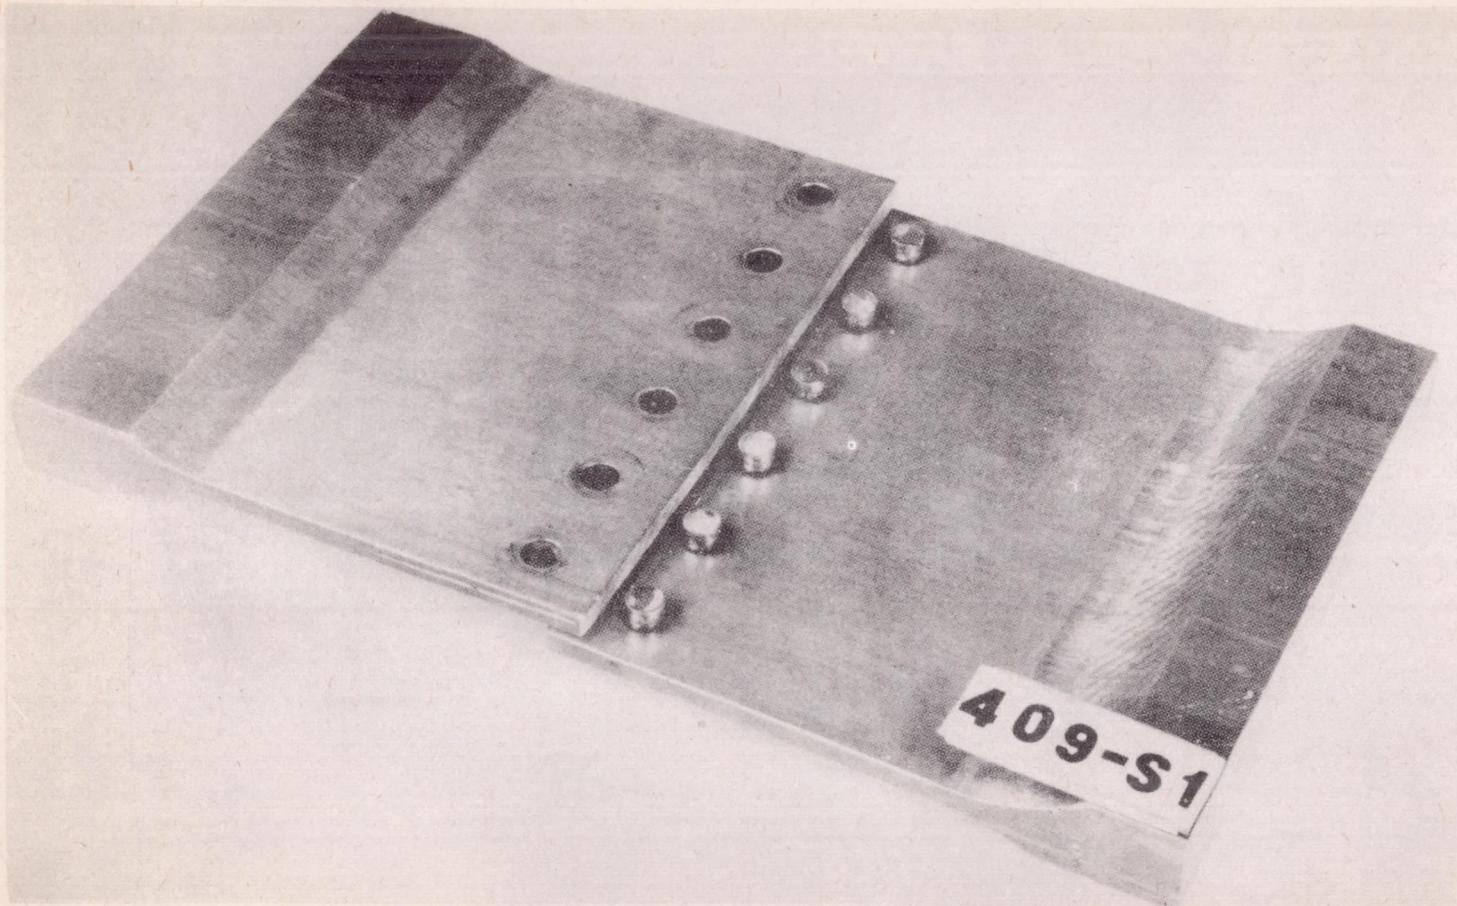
Fracture of type S specimen. Rivet heads pried off during test.
